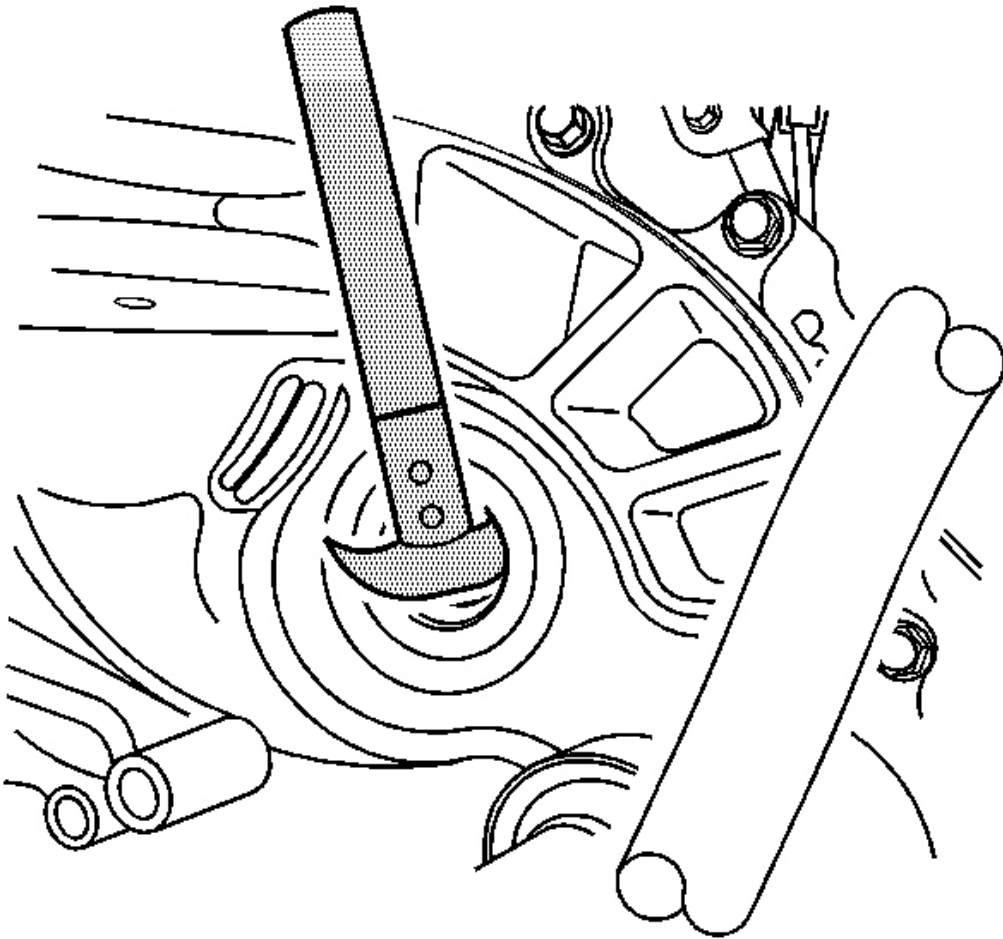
Removing Wheel Drive Shaft Oil Seal From Transmission Case Using J 45000
